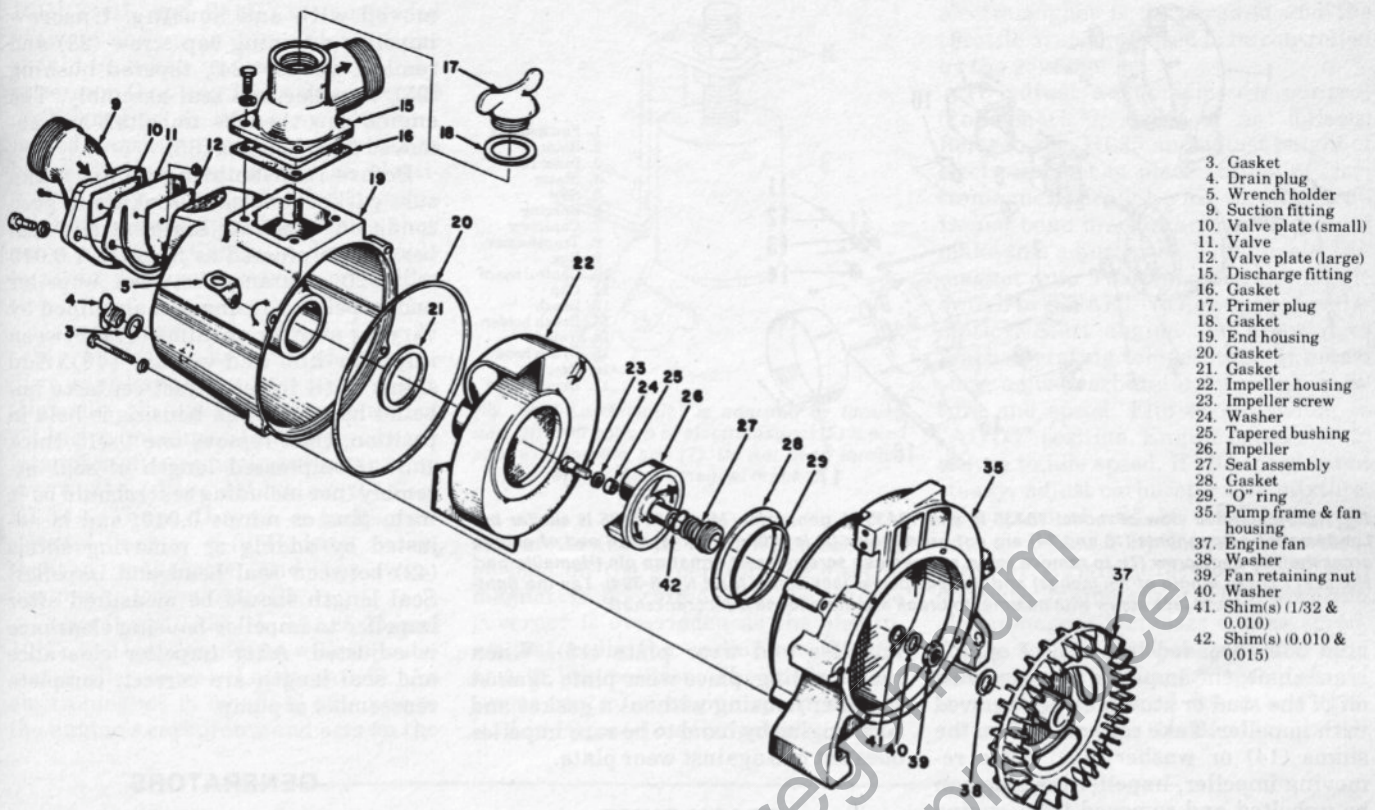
Exploded view of model 251TP3 pump assembly. Impeller screw (23) threads into end of engine crankshaft. Impeller is not solidly connected to engine crankshaft and can slip on tapered bushing (25) and end of crankshaft should a solid object become lodged between impeller and housing.
